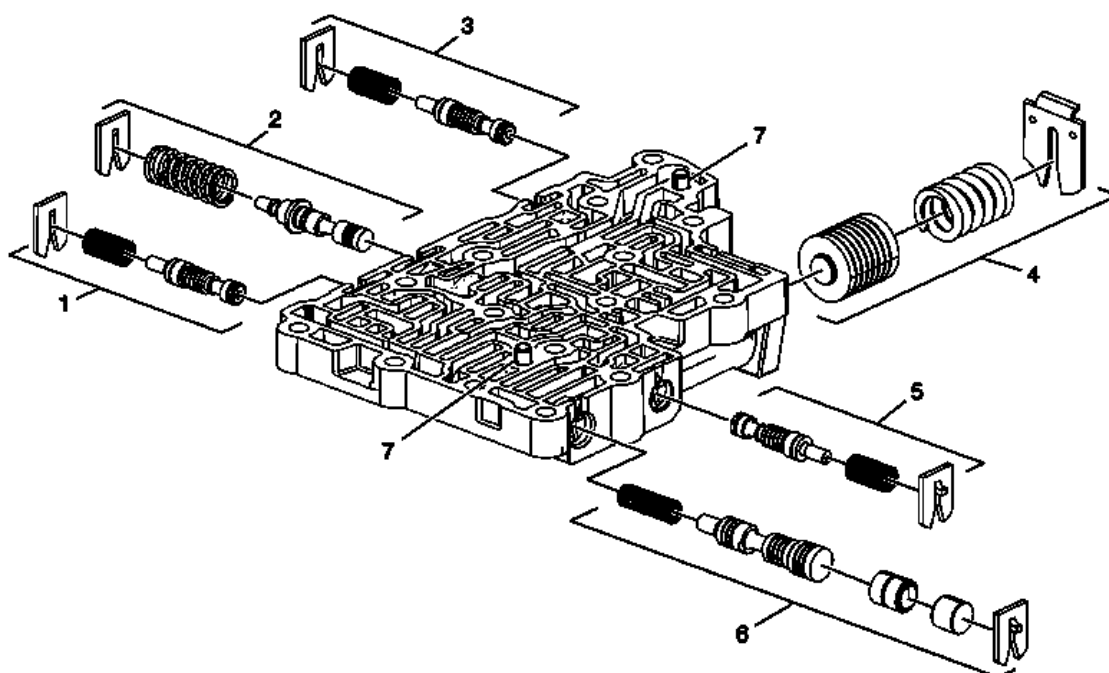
Control Valve Lower Body Assembly Cleaning and Inspection
